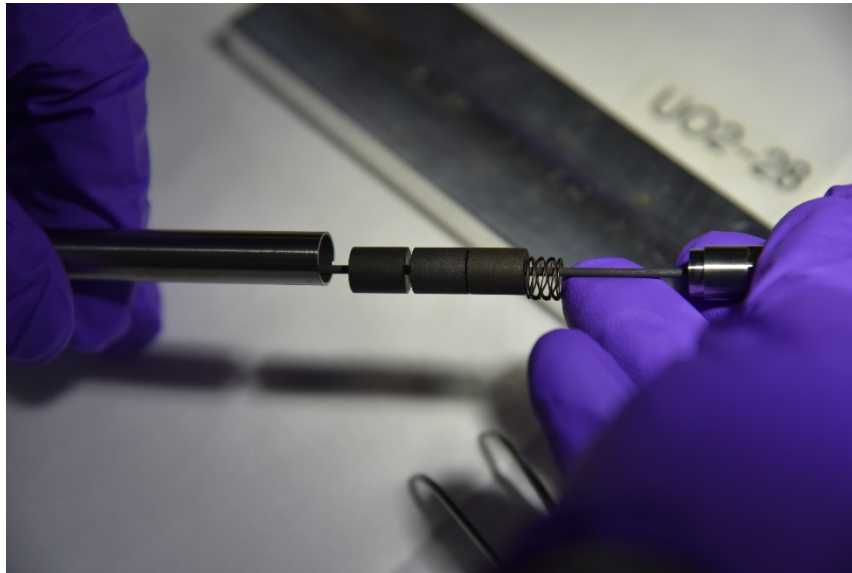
Assembly of a rodlet containing a fuel centerline thermocouple, including a custom-manufactured Conax plug through which the thermocouple is fed. Fuel pellets containing an annulus are visible as loaded onto the thermocouple.
